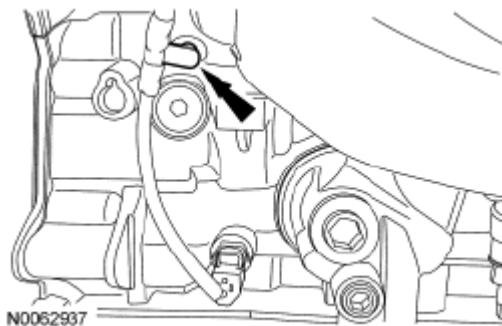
Locating Wiring Harness Pin-Type Retainer
